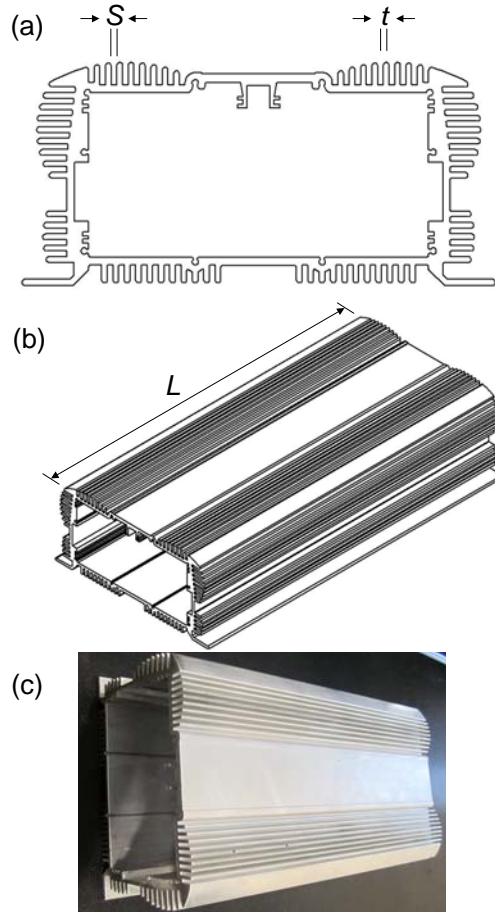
Schematic of the finned enclosures: a) cross-section view, b) isometric view; c) an actual enclosure.
